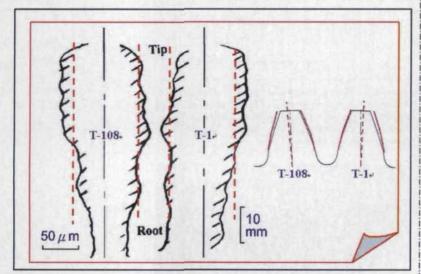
Tooth profile after induction hardening of tooth flank and root of gear shown in Figure 5.
